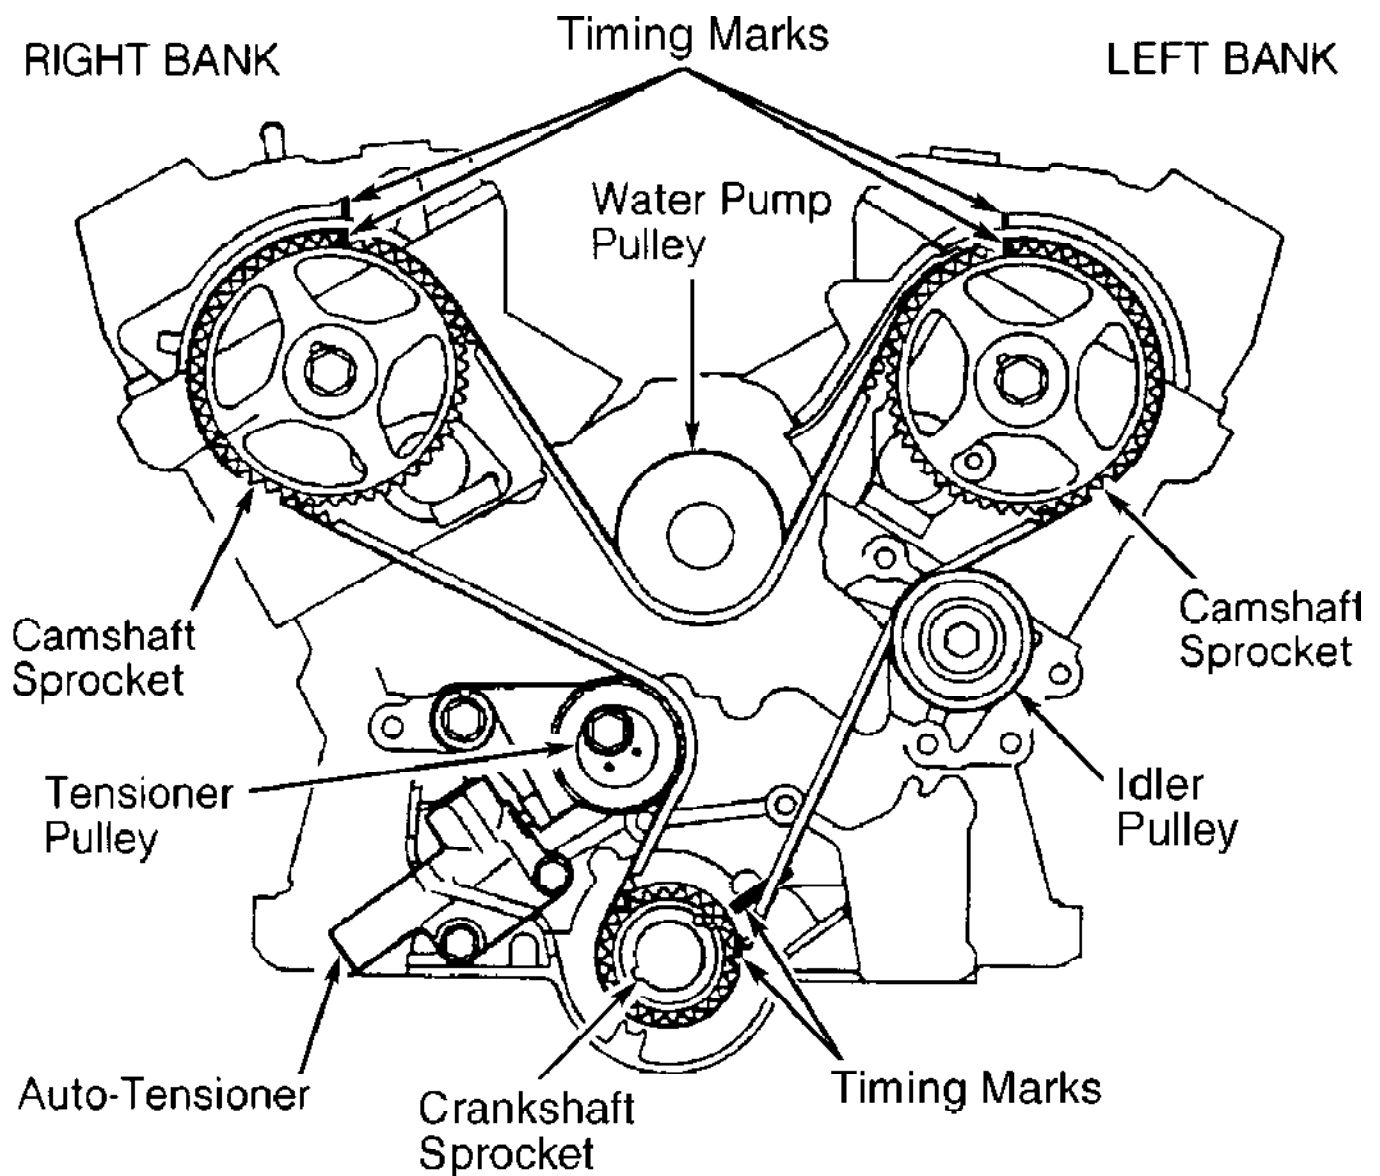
Exploded View Of Timing Belt Components (Montero Sport)
